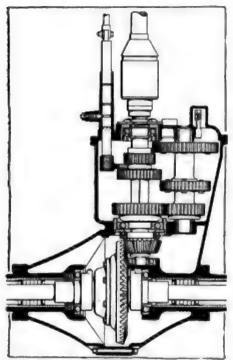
PACKARD REAR-AXLE CHANGE-GEAR
